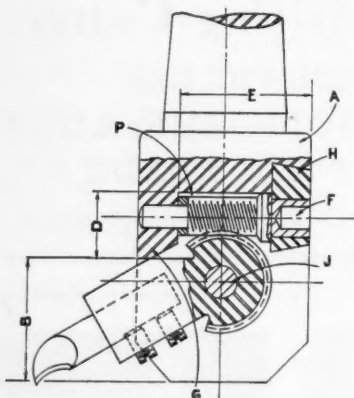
Drawing showing adjustment mechanism of boring tool.
